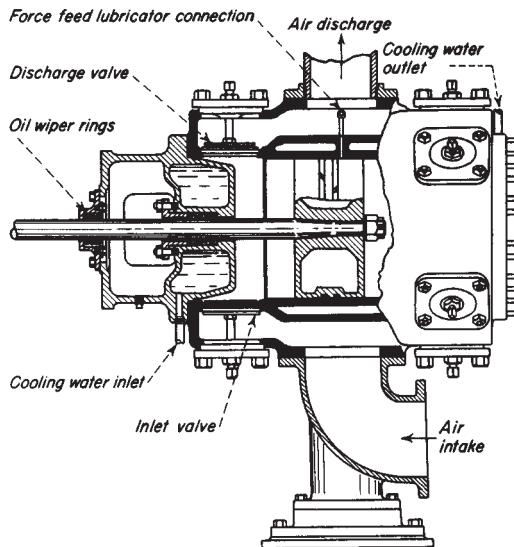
Typical double-acting compressor piston and cylinder.
